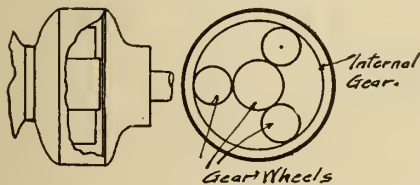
An Efficient Form of Reduction Gear for Direct Coupling. Slow Shaft in Line with Motor Shaft.
